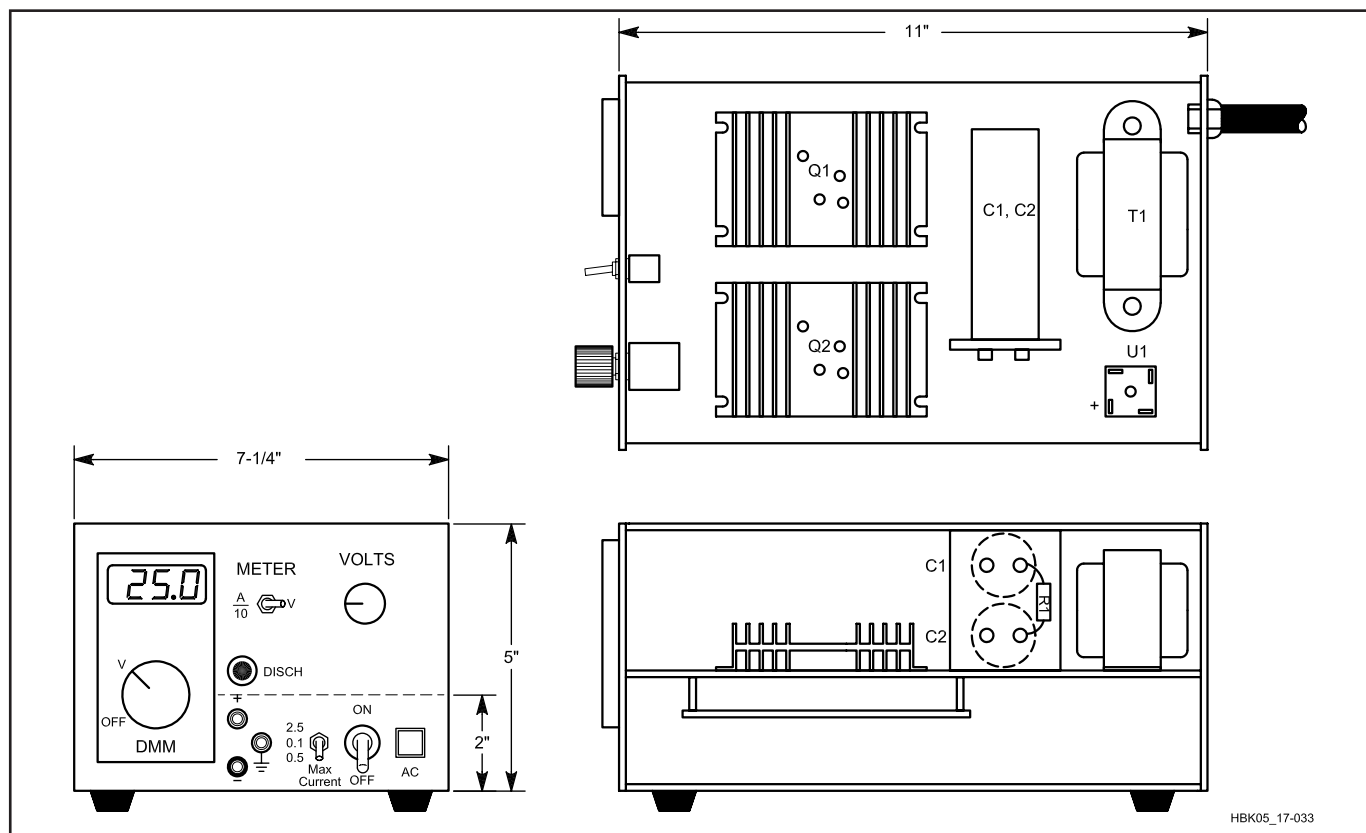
This three-view drawing shows the panel layout and locations of major power-supply components.
